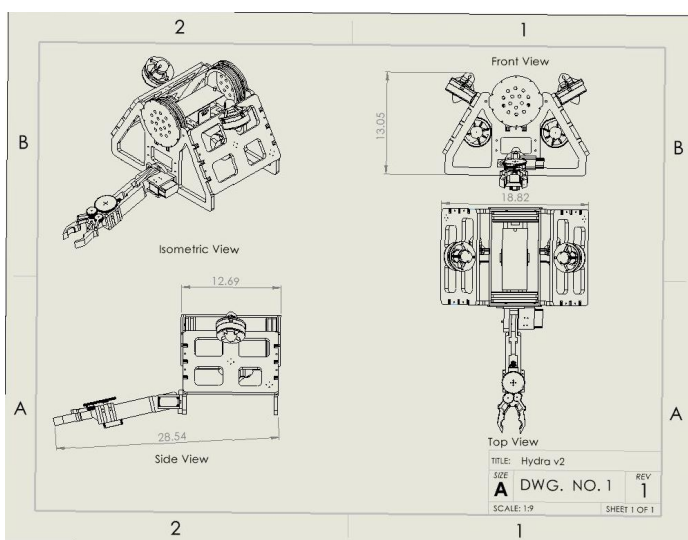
ROV Technical Drawing (Orthographic & Isometric Views)
